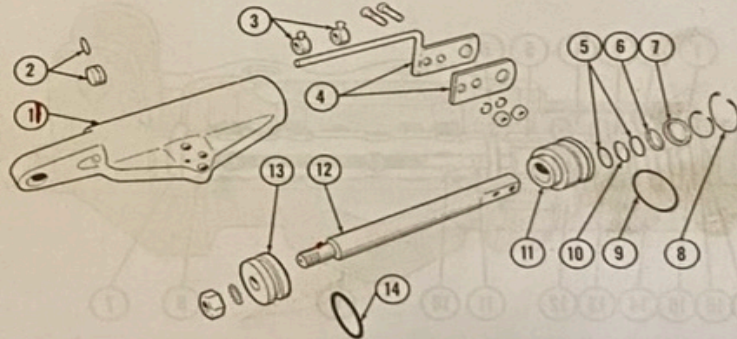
Exploded view of Pony hydraulic lift work cylinder.
